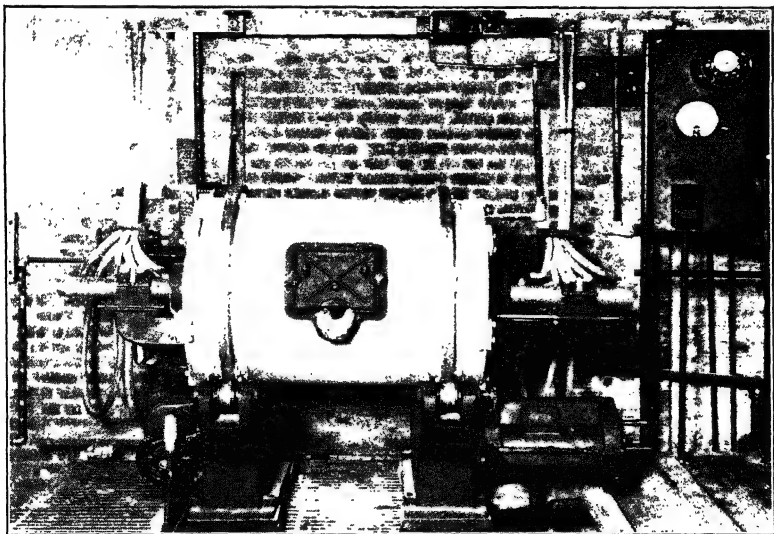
A 300- to 350-lb. Detroit electric furnace. (Courtesy Detroit Electric Furnace Company.)
